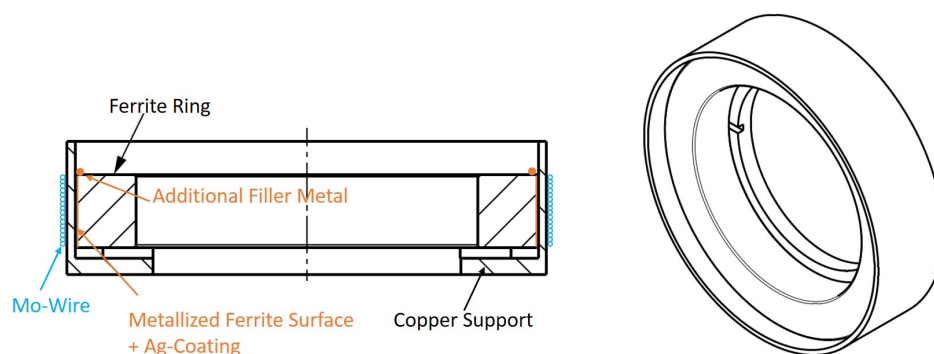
Assembly of ferrite ring and copper ring for the brazing test. (*Courtesy: F. Motschmann.*)
